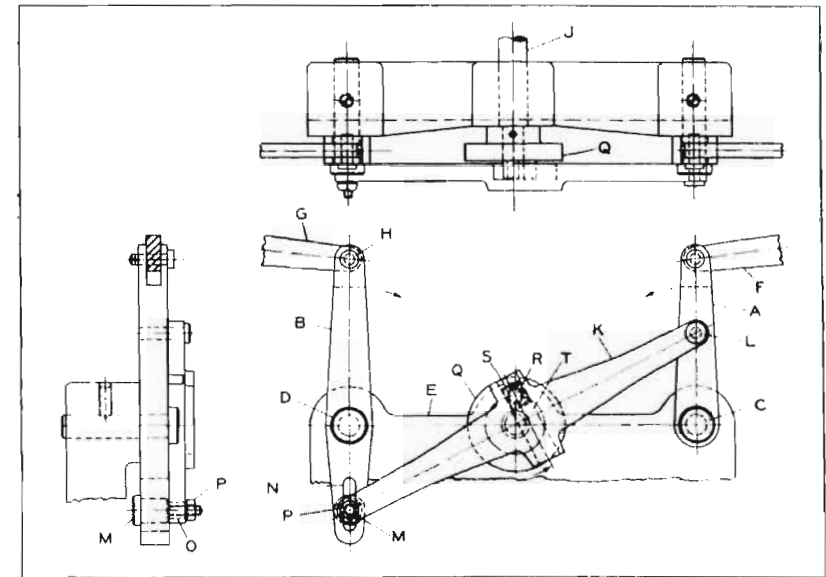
Drive mechanism for opposed reciprocating slides that permits stroke adjustment of one slide.
